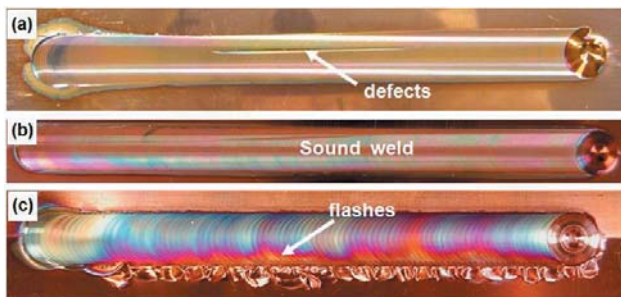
Three kinds of appearance of the FSW processed Cu welds. (a) defects; (b) sound weld; and (c) superfluous flash
